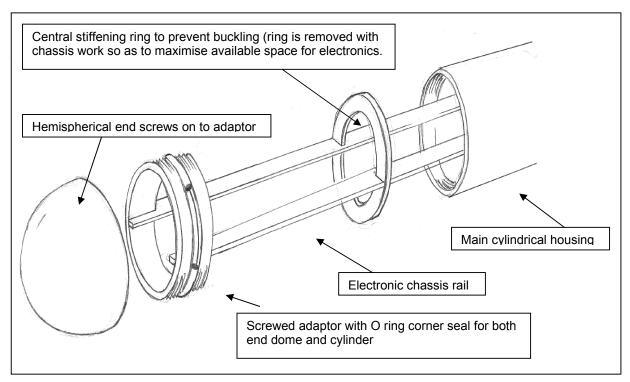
Sketch of retractable stiffening rings from pressure cylinder to provide more useable space for internal assemblies
